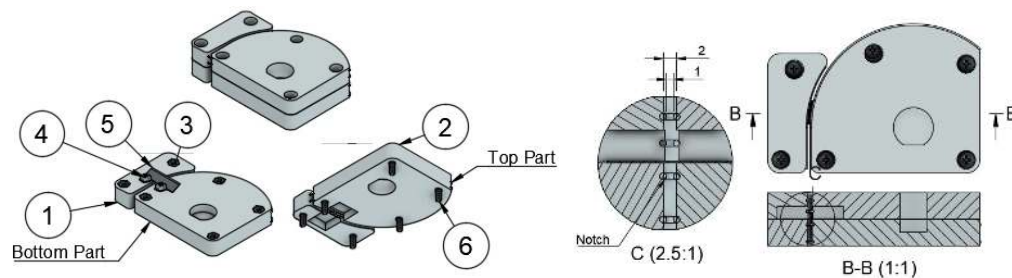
Variation 2 components. 1. Bottom part, 2. top part, 3. hexnut, 4. screw, 5. cutting blade, 6. screw.
